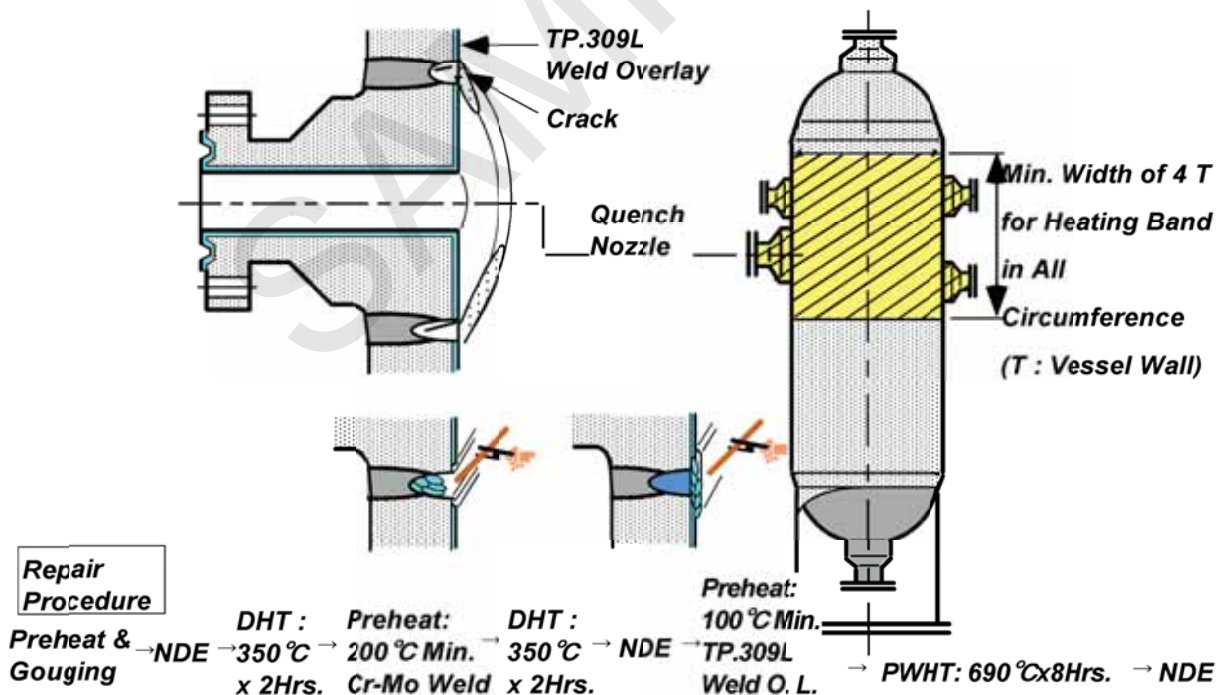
Repair welding of nozzle attachment weld
